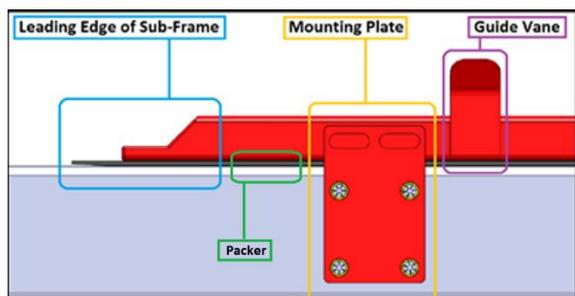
Example of a suitable sub-frame leading edge, mounting Plate and Body guide (Guide Vane). Note additional examples in Modification code Section J (J1)
